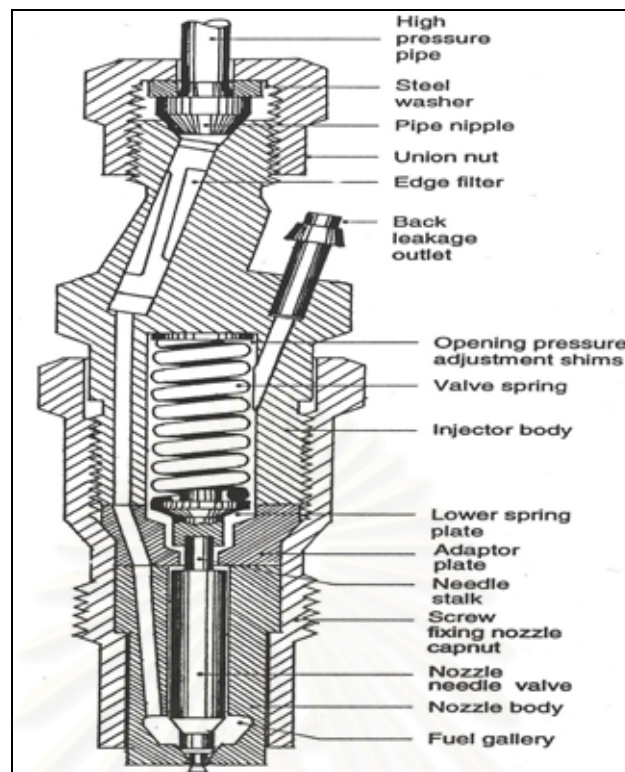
Geometry of the Pintle-nozzle injector, adapted from [79]
